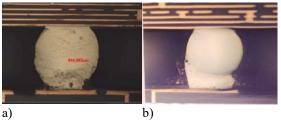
a) A micrograph showing HiP defect and b) A micrograph showing tears, both in low-temperature solder assembly.
